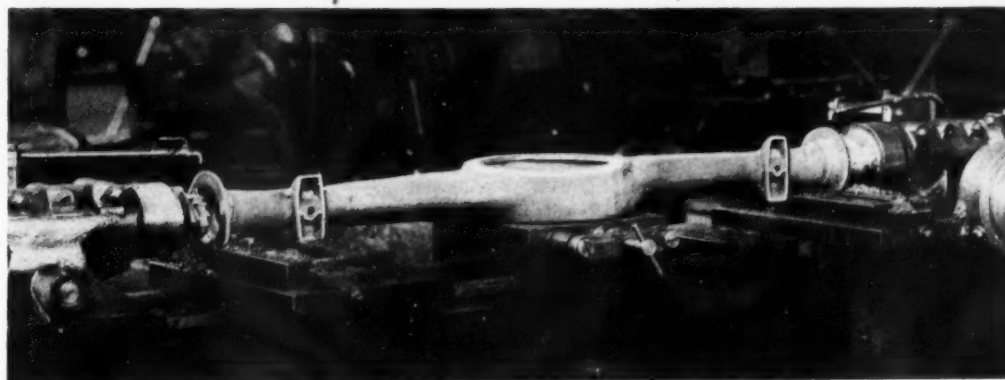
Reaming both ends of axle in Murchey double end machine. Housing is dropped into saddles at ends and clamped at center
